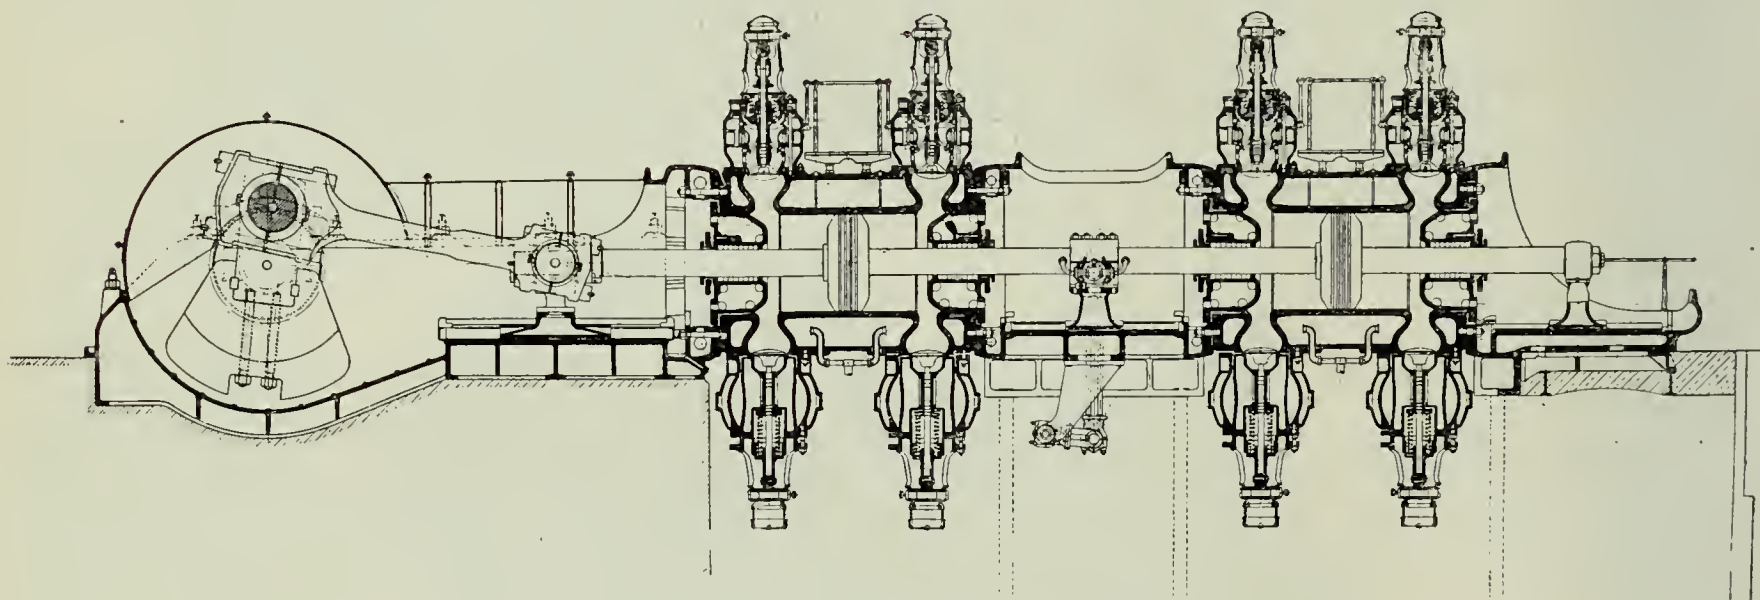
LONGITUDINAL SECTION OF G.H.H. ENGINE.
